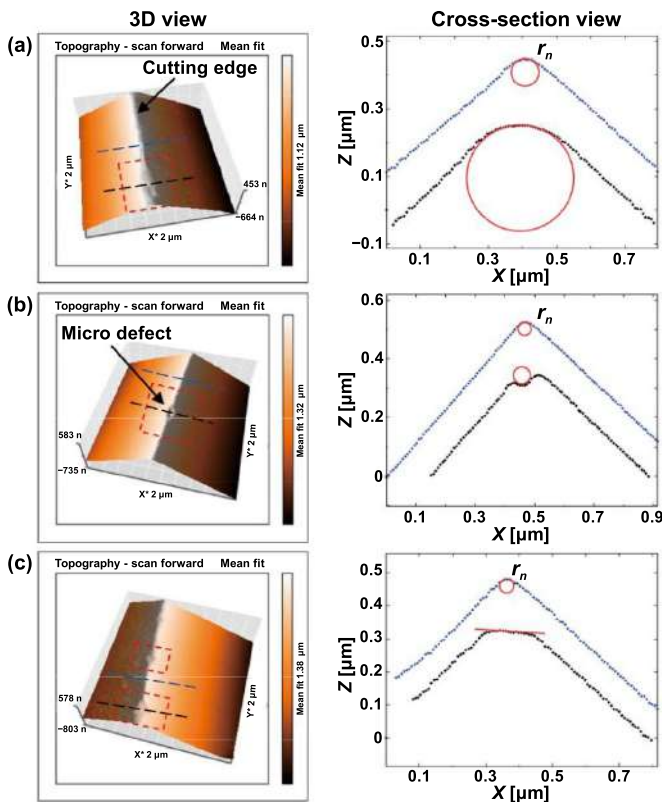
Three-dimensional and cross-section views of edge defects: (a) blunt-edge micro defect, (b) crescent-edge micro defect, and (c) flat-edge micro defect [88] (Reproduced from [88]. CC BY 4.0).
